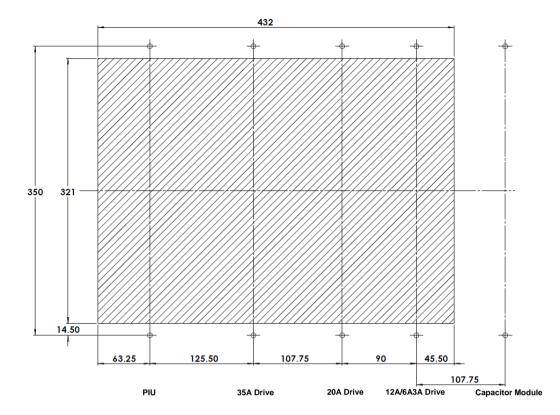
PIU, 35A, 20A and 12A/6A/3A drives heatsink cut-outs and Capacitor Module mounting hole positions in an array Recessed mount
